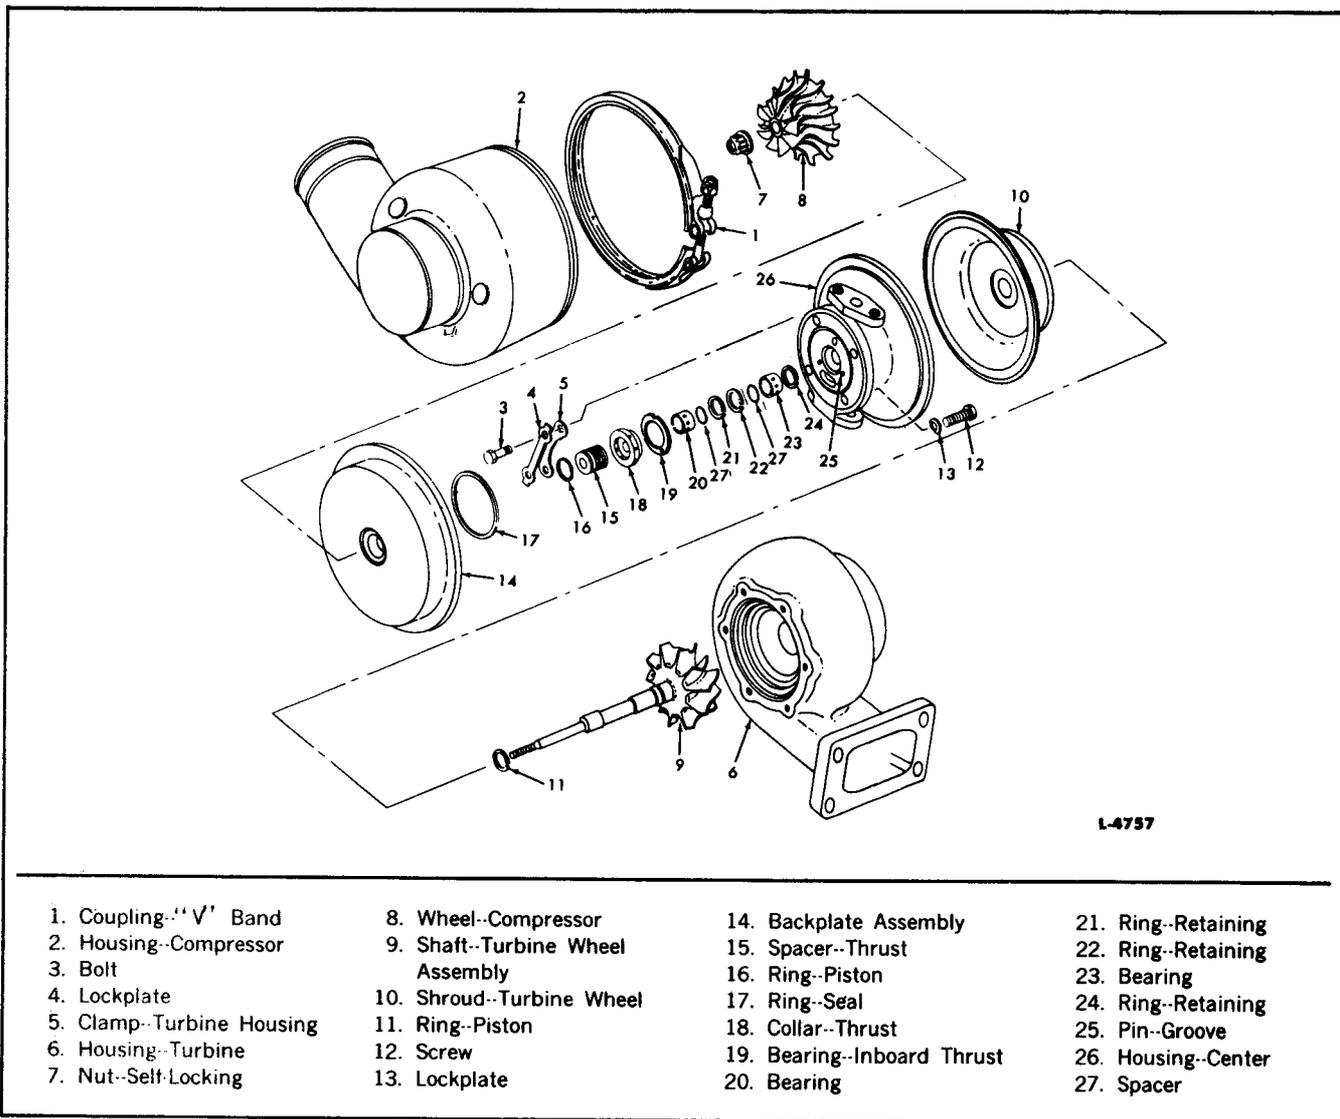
Model TE0675 Turbocharger Details and Relative Location of Parts
